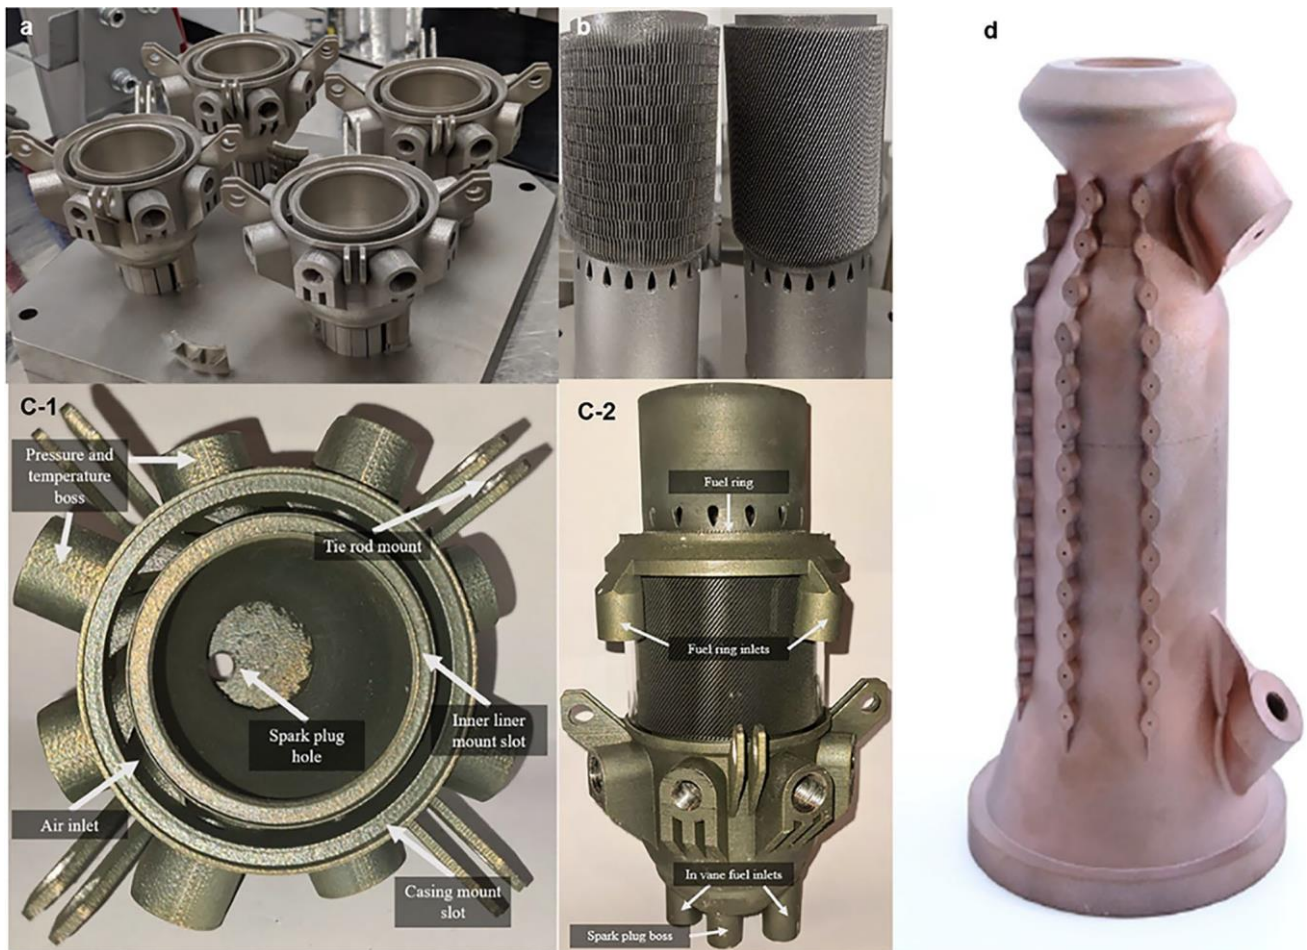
a As printed swirler [99]. b Printed backside cooled combustor [100]. c-1 AM radial swirler printed using In625. c-2 In625 combustor assembly [101]. d CuCrZr combustion chamber after printing liner [102]
